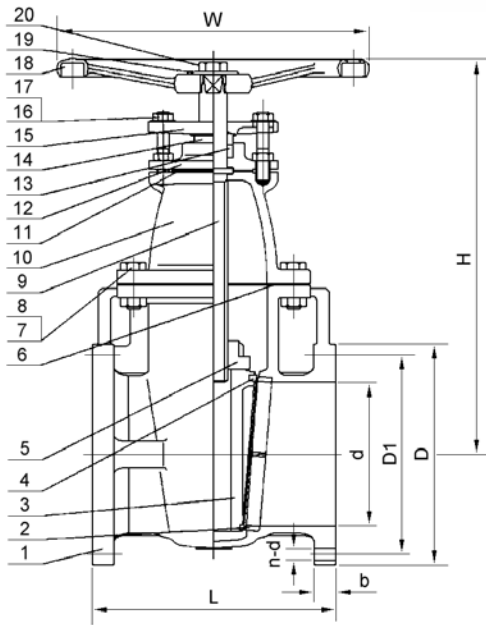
CI-125 Class 125, Flanged ends, bolted bonnet, Cast Iron body & bonnet, Bronze trim.
